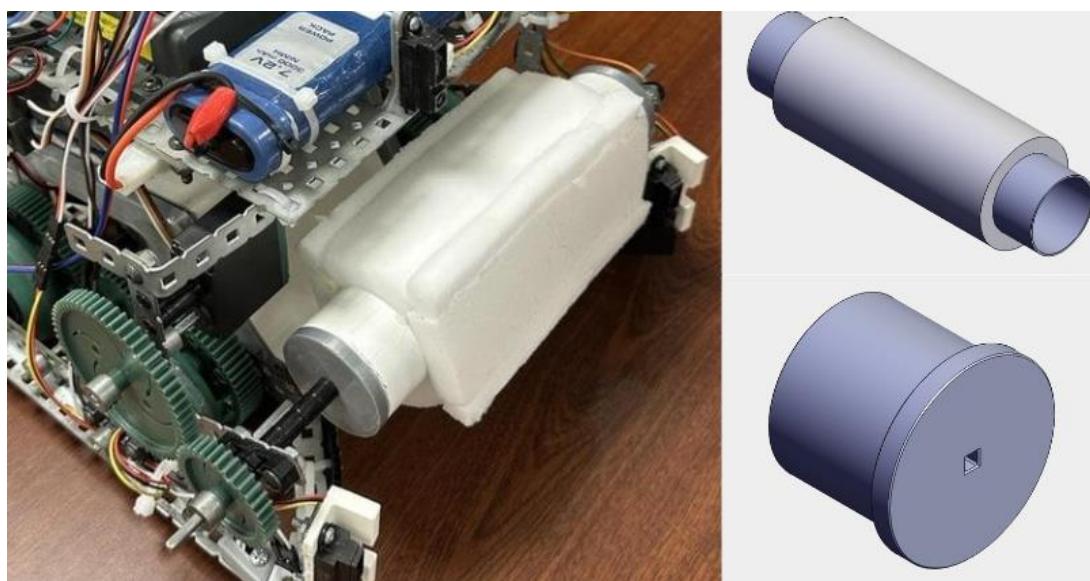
Close up of Robot's Collector with its Respective 3D Printed Parts
